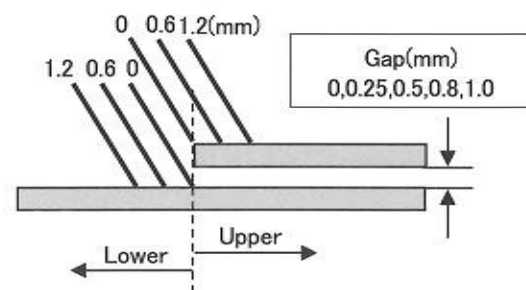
Set up of joint gap and torch aiming positions at lap joint welding
